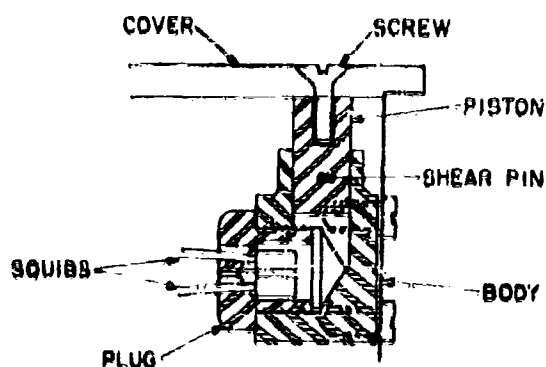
Explosive Bolt - Shear Pin Type
